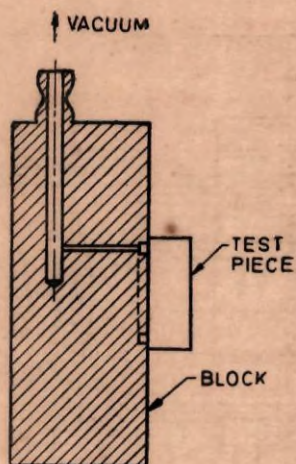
SUCTION HOLDER FOR SINGLE TEST PIECE
